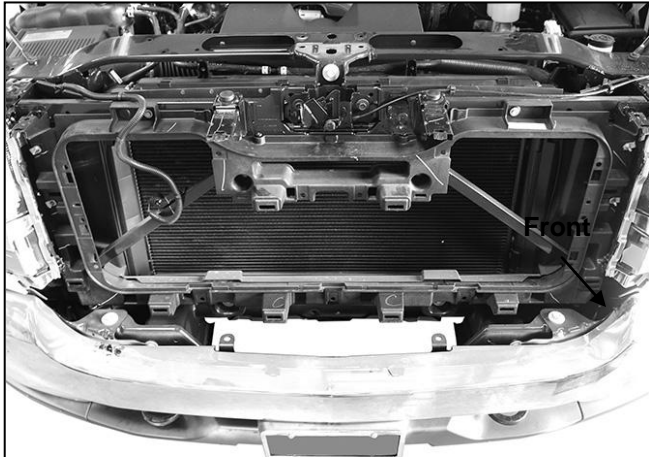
Remove cover between radiator and grille. Remove screws attaching top of grille (arrows)
